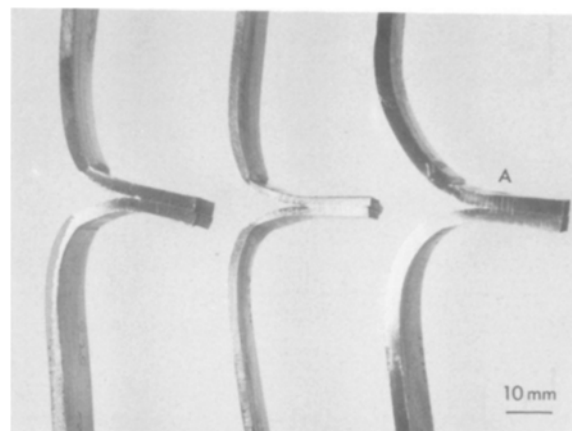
Test pieces after initial peel fracture in the SHT condition at room temperature.
